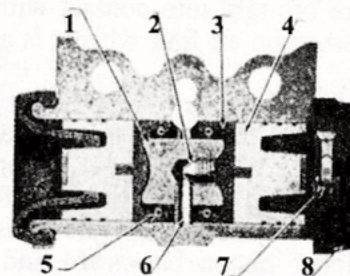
Wheel cylinder assembly as used on Chrysler Lockheed installations. The cup expander 5 is not used on all Lockheed models
